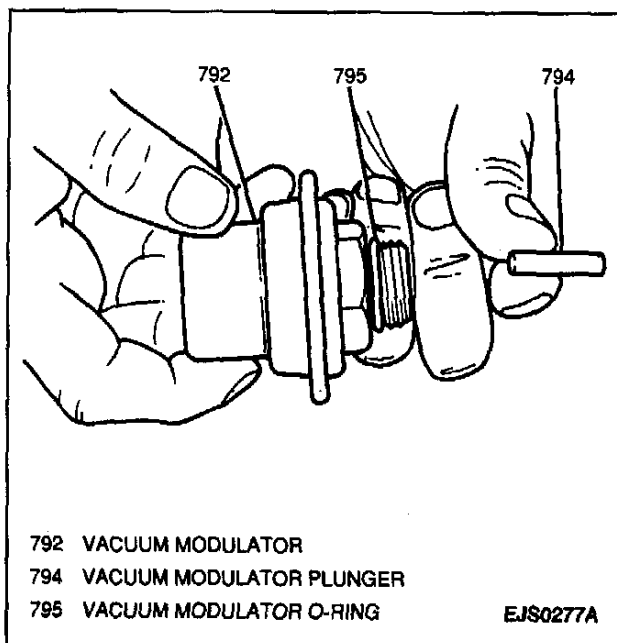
Inspecting Vacuum Modulator (3L30, 3-Speed)
